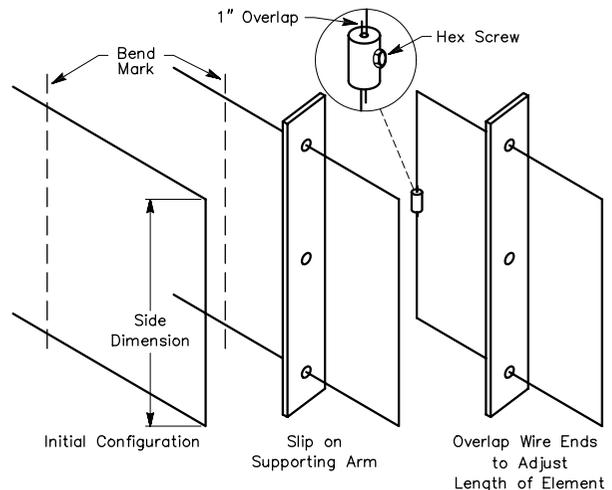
Illustration showing how the aluminum element wires are bent. The adjustment clamp and its location are also shown.
